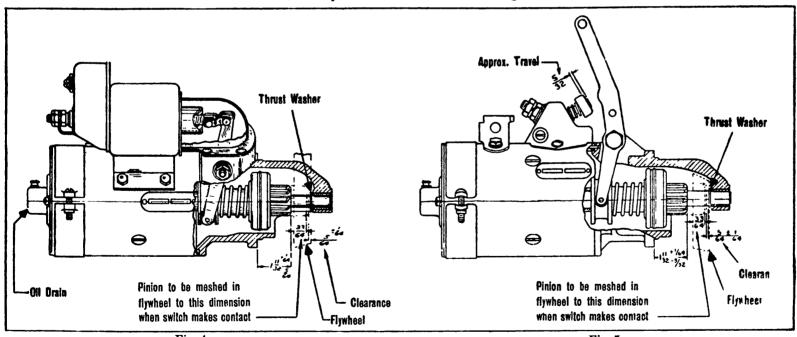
is a side view of the MAX-4016 starting motor and solenoid used on the 1936 Chrysler, Model C-7 automobiles. The pinion, when
